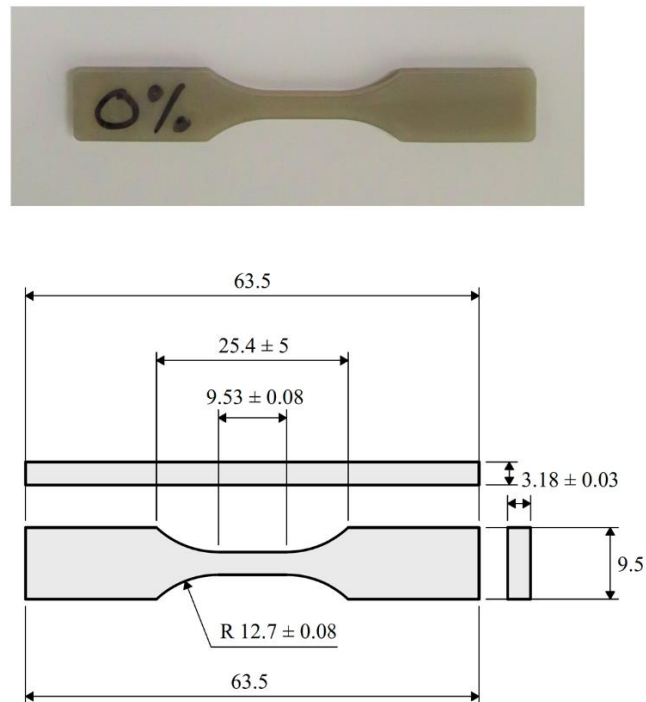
Example specimen before testing (top), and specimen dimensions, in mm (bottom).
